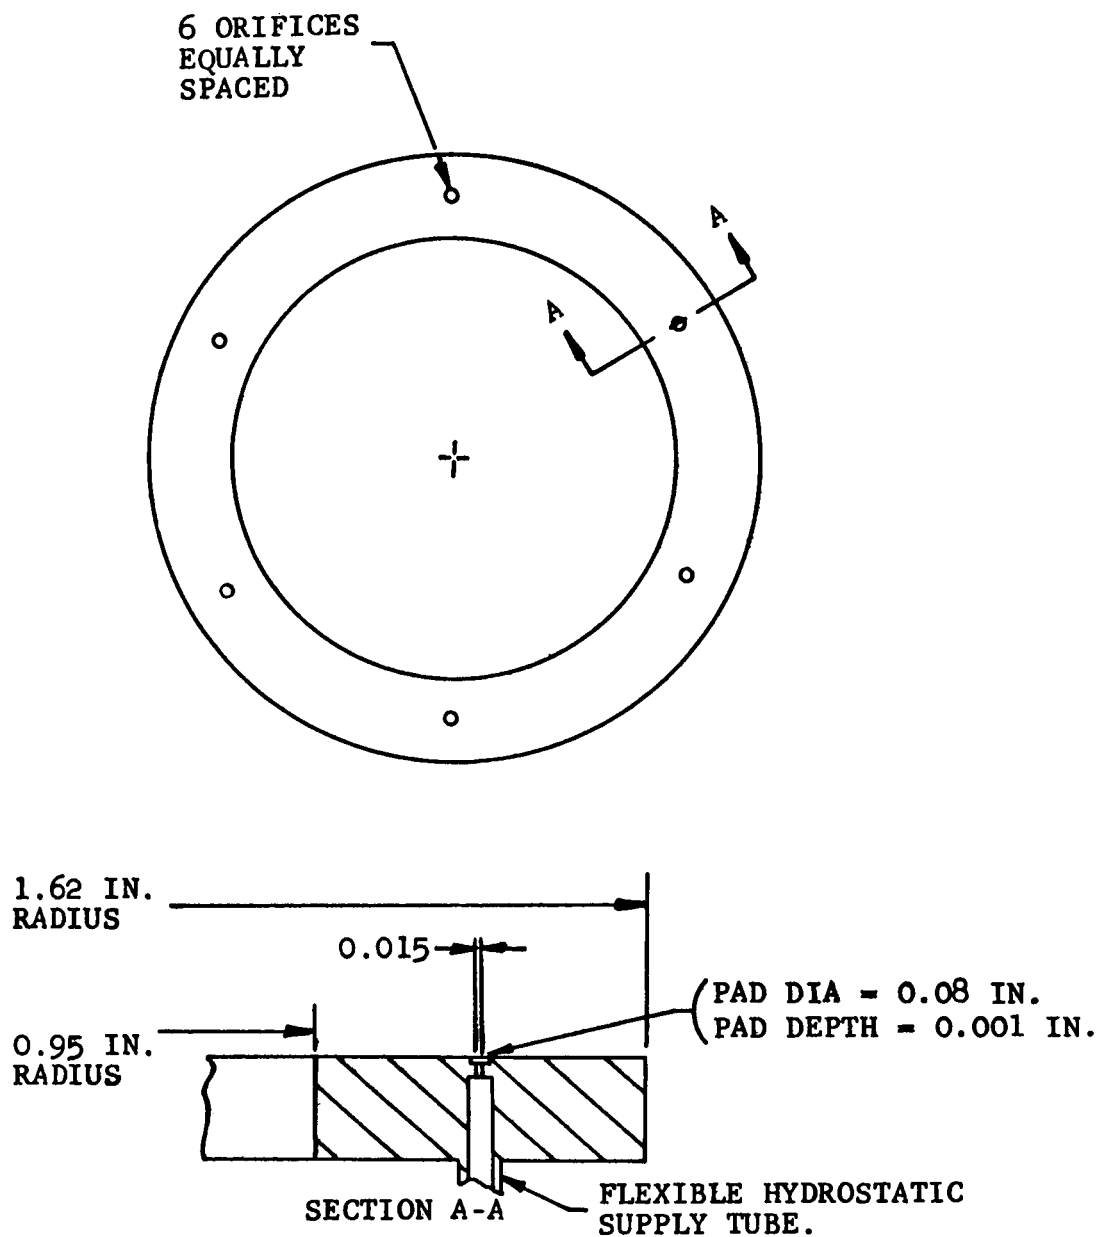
shows the double-sided thrust bearing design. The rotor slider is enclosed by two elements; the hydrodynamic bearing is on the compressor side, and the hydrostatic bearing is on the turbine side. The two thrust stators are tied together and supported by a gimbal that allows rotation of the stators in the plane of the slider. Figures 18 and 19 schematically show the hydrostatic and hydrodynamic thrust stators. The hydrostatic stator incorporates six orifices for the hydrostatic lift-off and operation during "reverse" thrust conditions (prior to self-sustained speeds). To facilitate start-up, four hydrostatic orificed pads have been incorporated in the hydrodynamic bearing surface to ensure an adequate operating clearance between the slider and the hydrodynamic bearing, thus precluding rubbing of these bearing surfaces.
